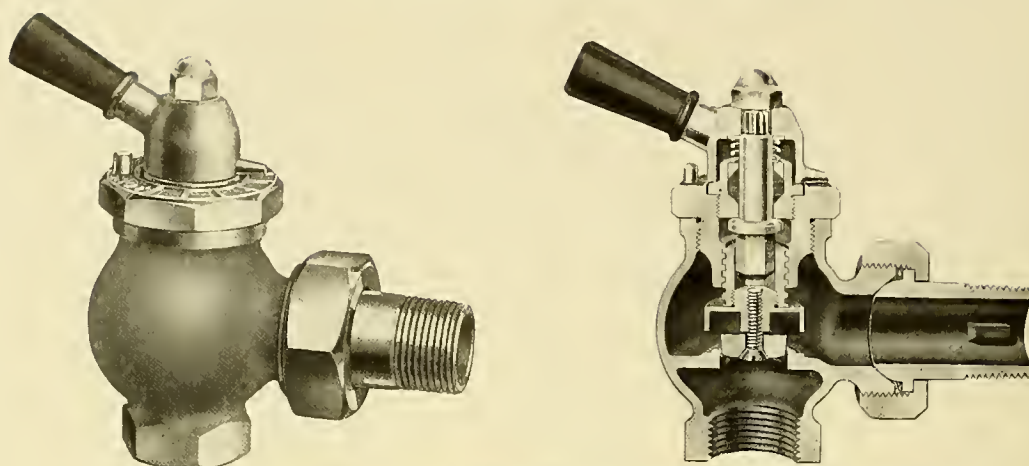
The Webster Type W Modulation Valve—shown in partly open position
